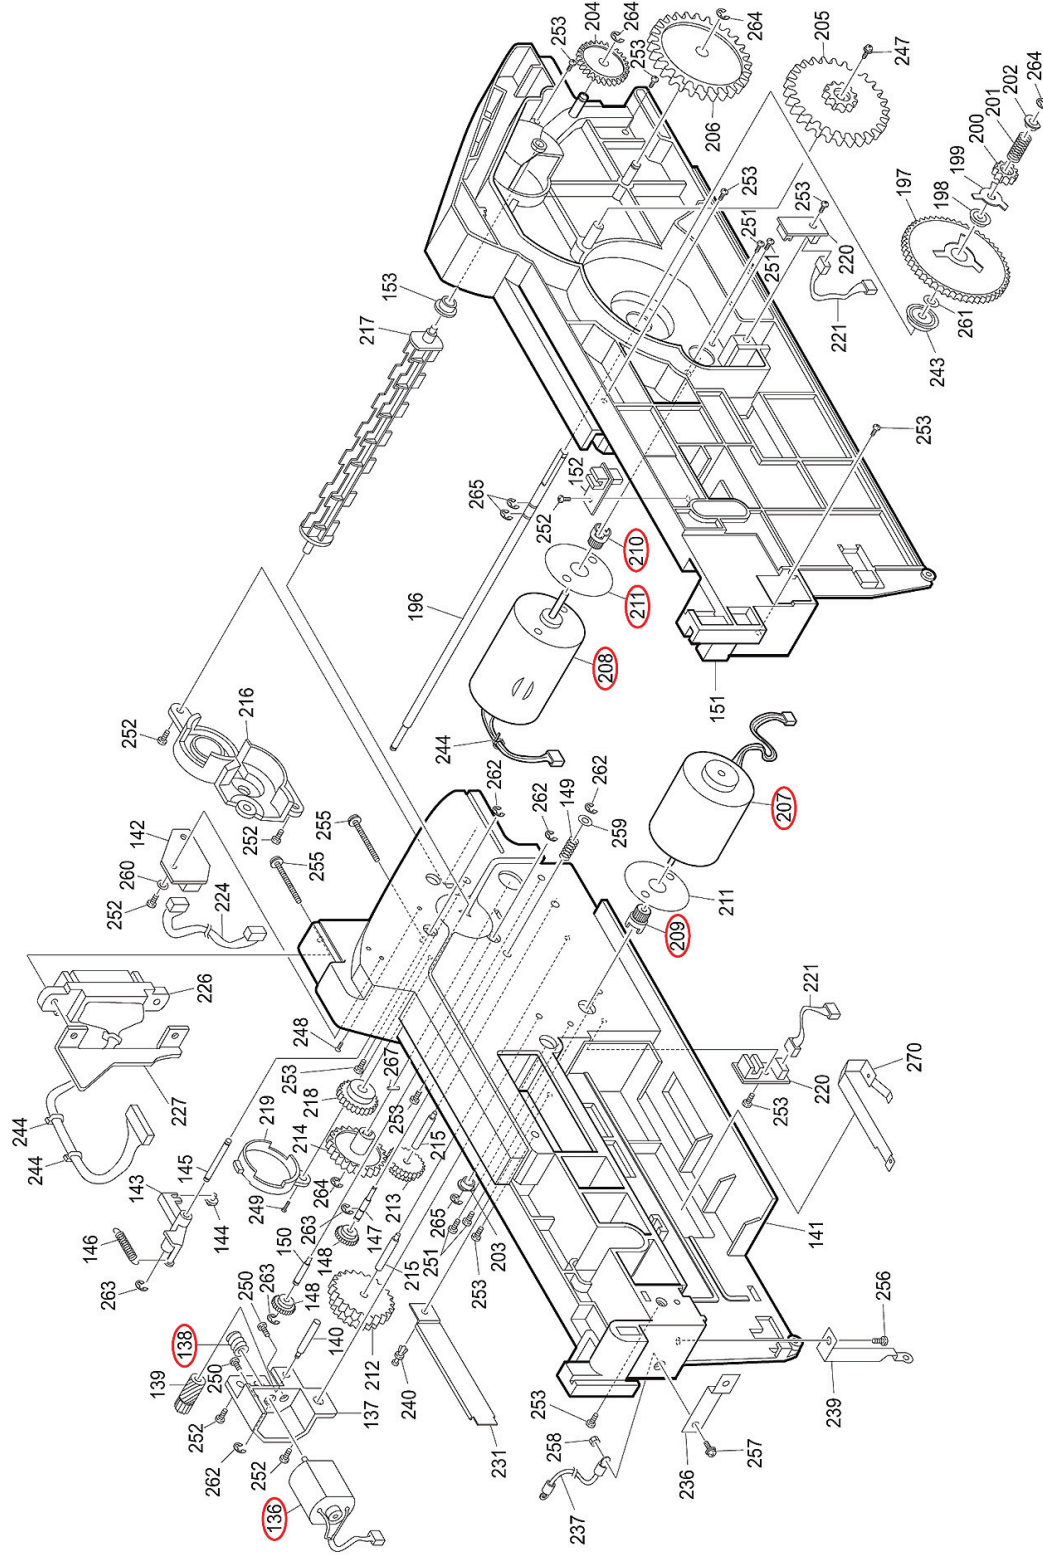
UBA Acceptor Unit Exploded View (Part 3)
